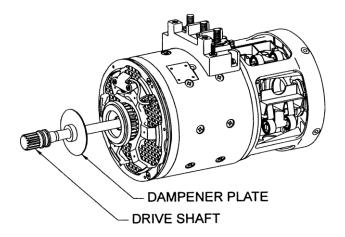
Inserting Drive Shaft into Armature Shaft
